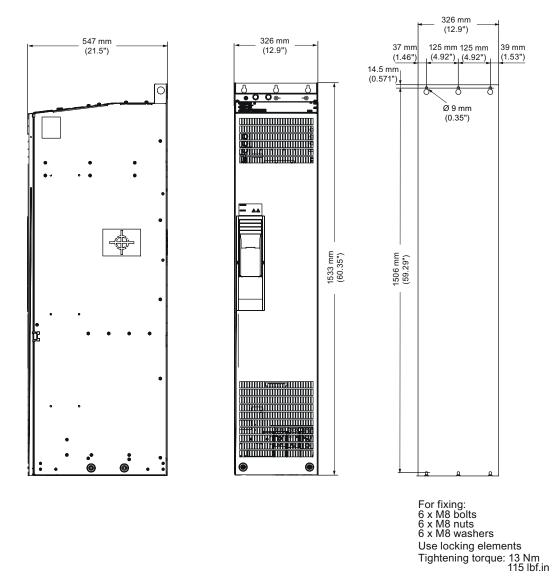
Dimensions and drill pattern for Power Module PM240, FSGX, IP20, unfiltered
